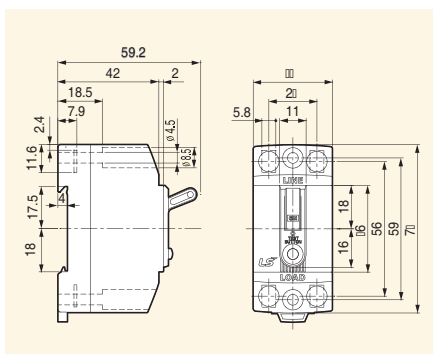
Type RKS | Drawing 3: Type RKS-b | Drawing 4: Type 32KGRc & 32KGRd
